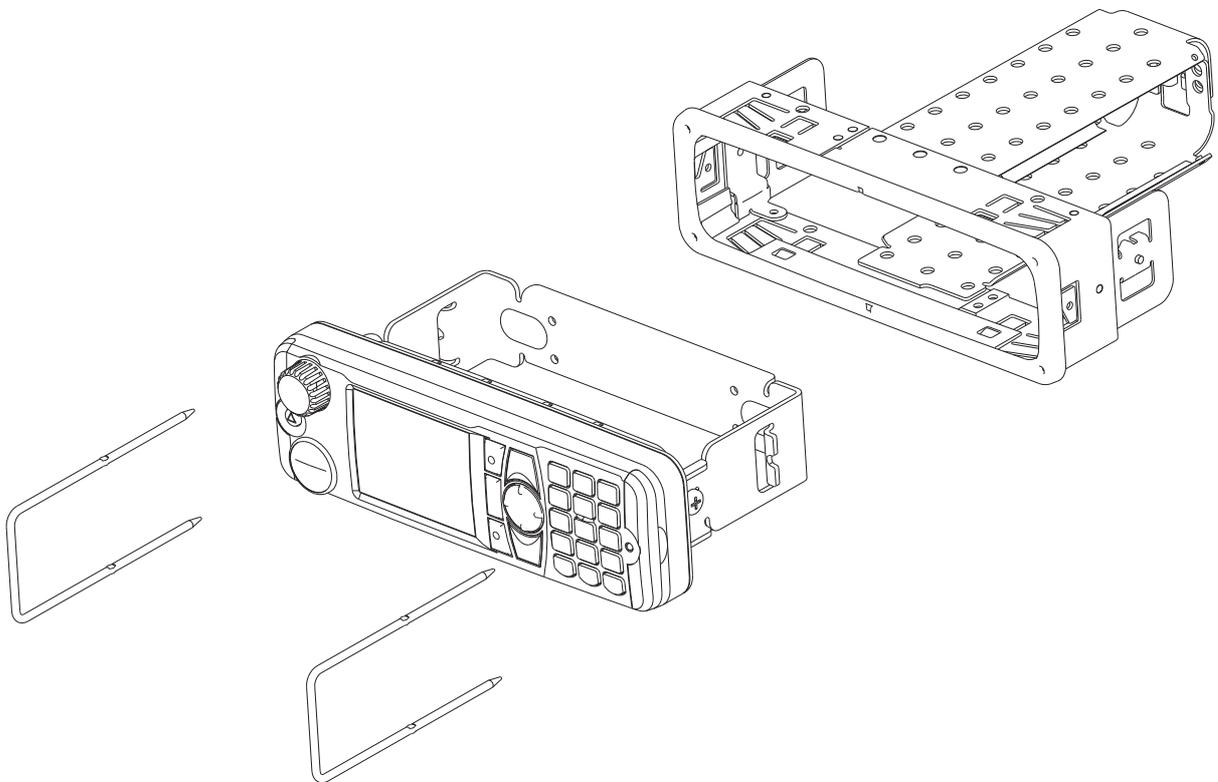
Mounting the Remote Mount Enhanced Control Head with the DIN Mount Bracket into the DIN Frame
